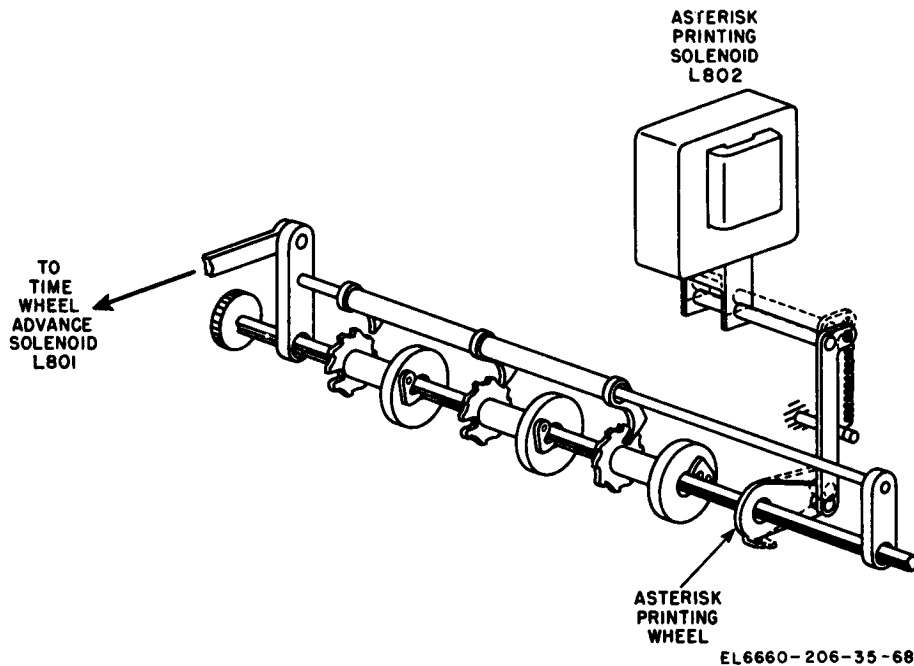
Asterisk printing solenoid and printing wheel, mechanical diagram.
